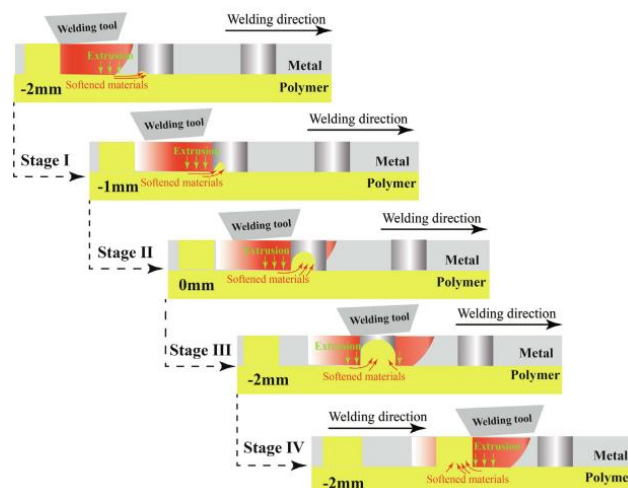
Schematic of Friction self-riveting welding [60]
